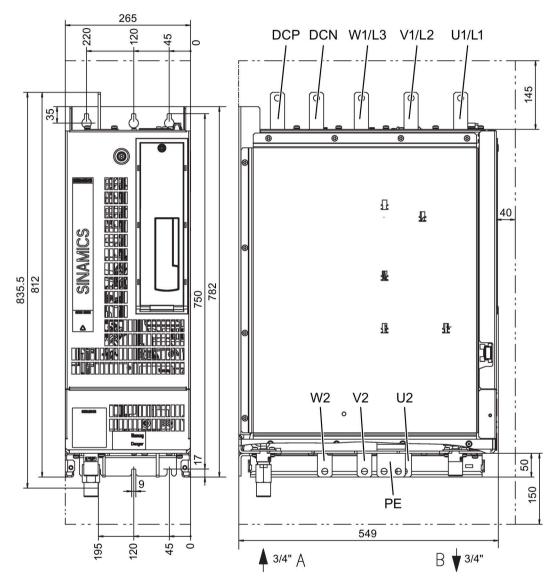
Dimension drawing Power Module, frame size FL. Front view, side view
